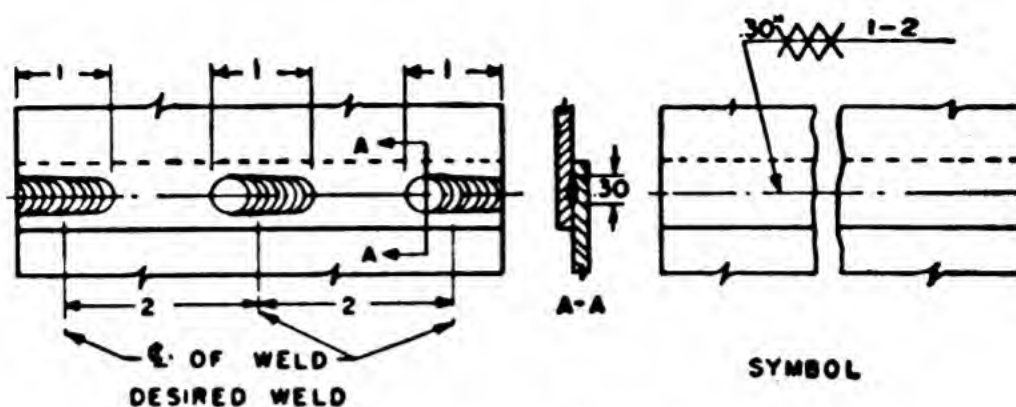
Length and pitch of intermittent seam welds.
